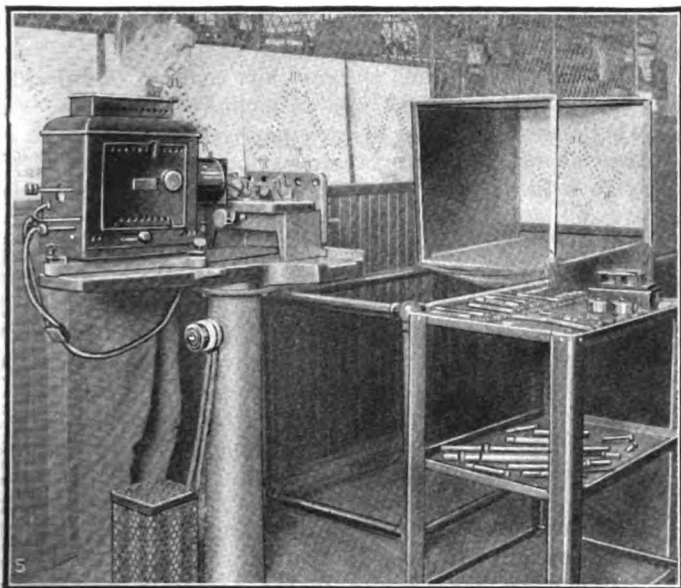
USING THREAD COMPARATOR IN THE SHOP. FIG. 6. DRILLING RADIATOR FRAME
